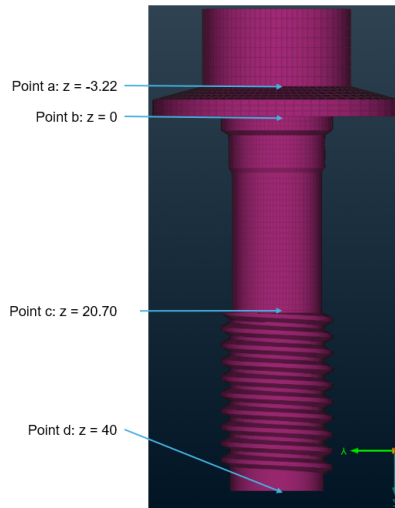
Different contact surfaces at the clamped part - threaded part contact interface
